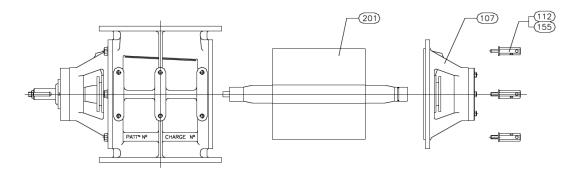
Dismantling easy detachable execution (for cleaning)
